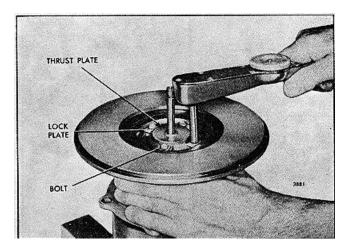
Tightening Thrust Plate Retaining Bolts
